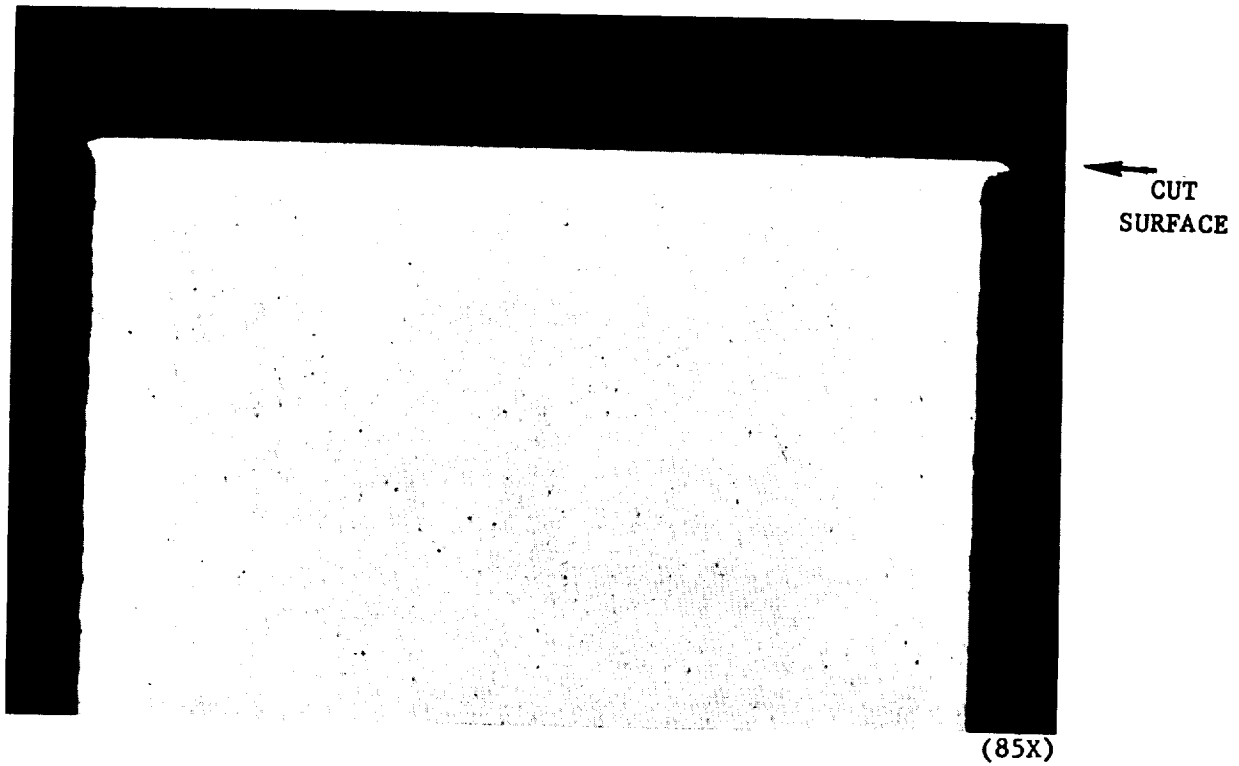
CROSS-SECTION OF SURFACE CUT DRY ON ABRASIVE WHEEL.
